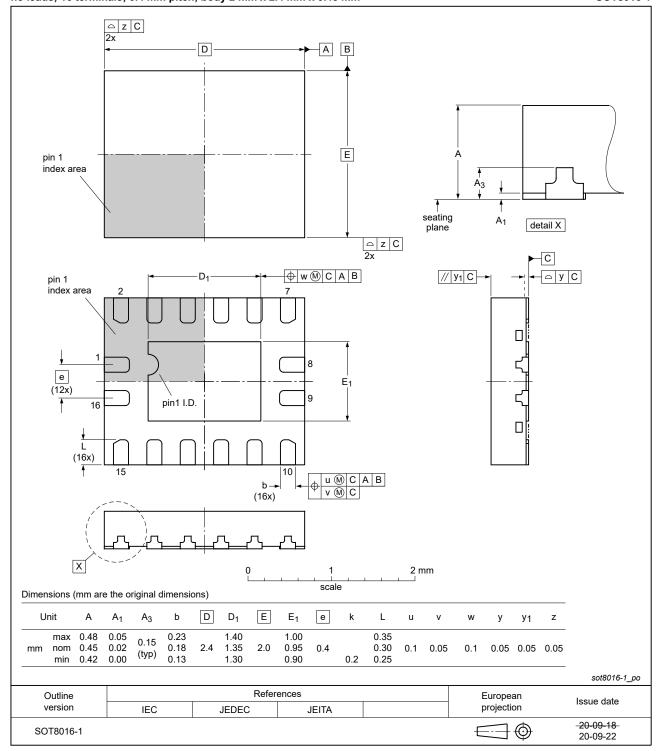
Package outline SOT8016-1 (DHXQFN16)
